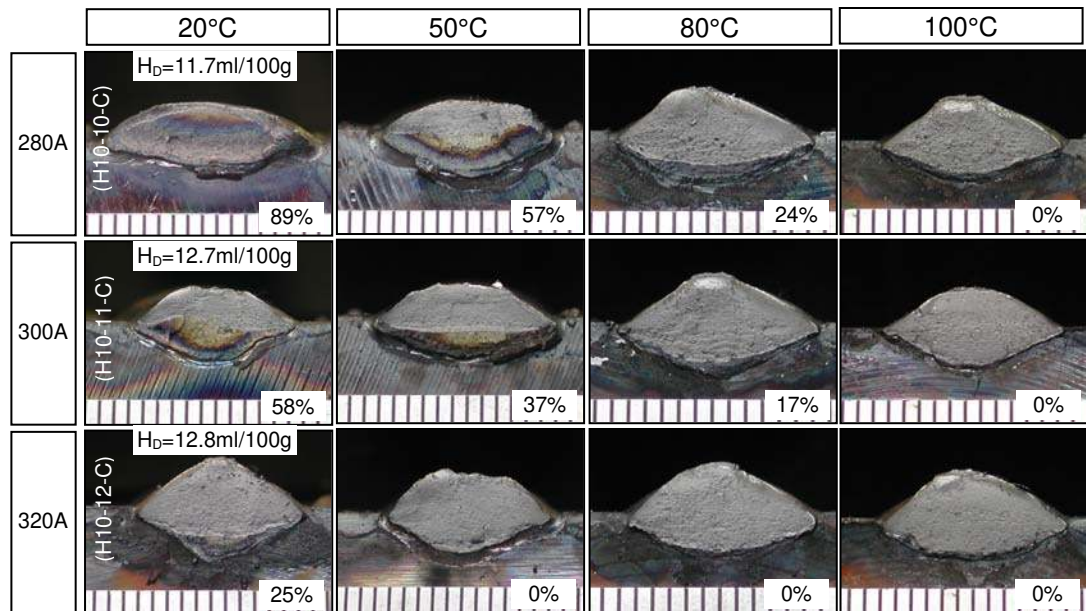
23 Photograph showing the G-BOP fracture faces with cracking percentage of H10 weld metal deposited at preheat temperatures 20, 50, 80 and 100 °C using CO<sub>2</sub> shielding gas and CTWD of 15 mm.
